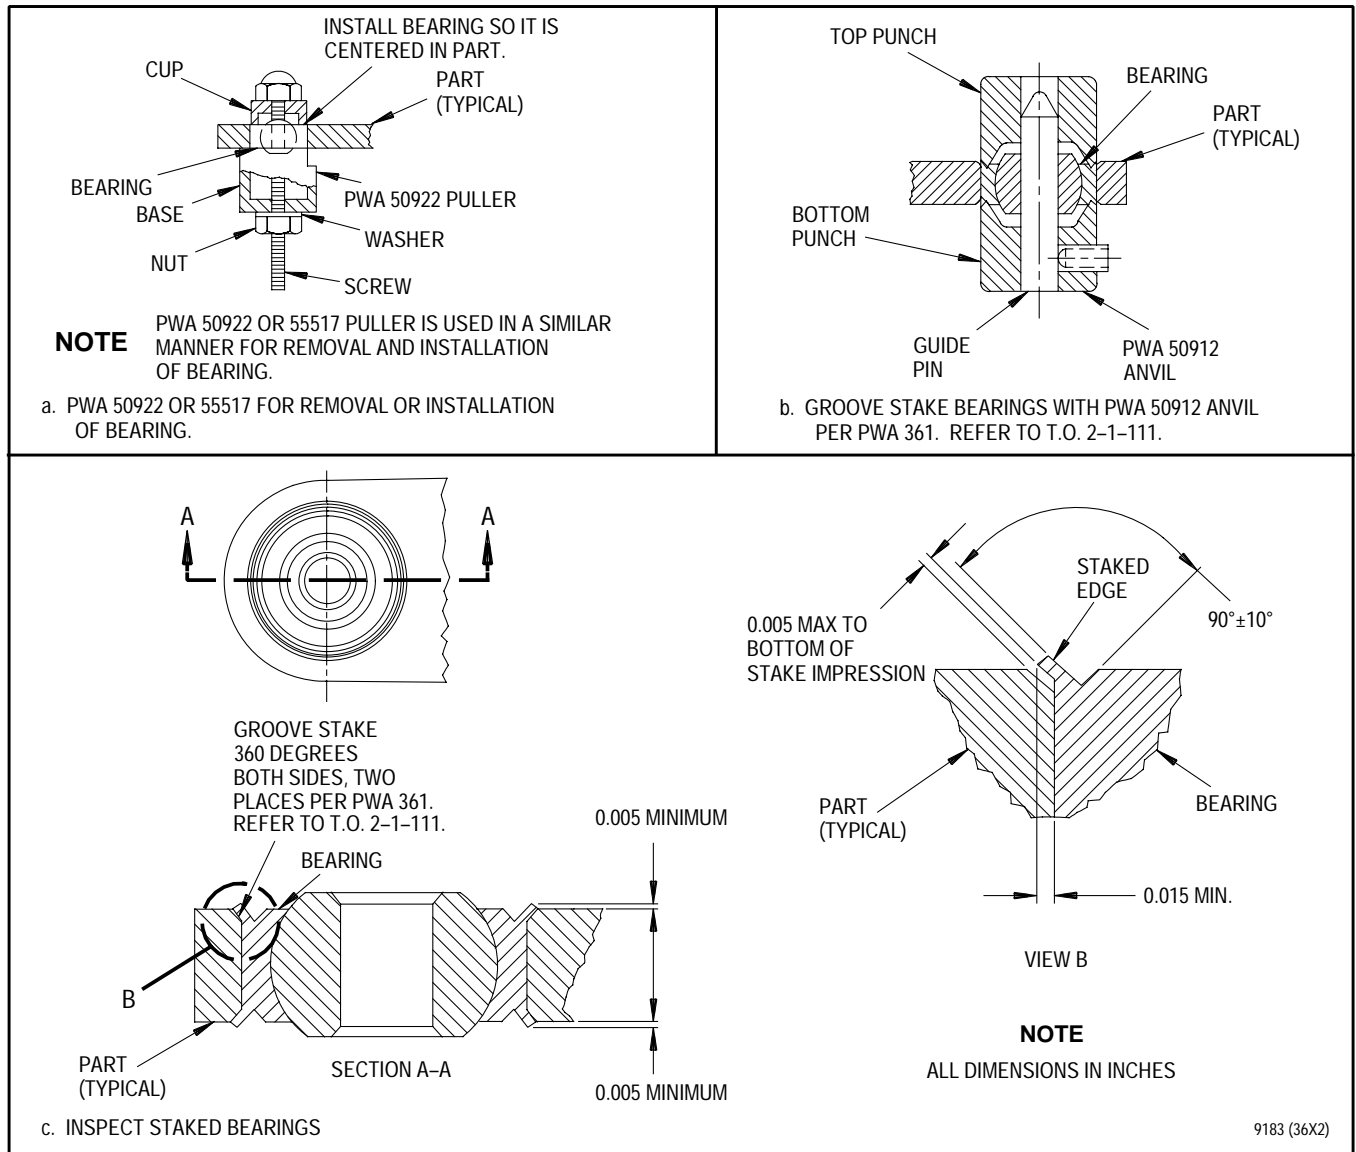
Rear Compressor Stator Synchronizing Arm Assembly - Self-Aligning Bearing Replacement
